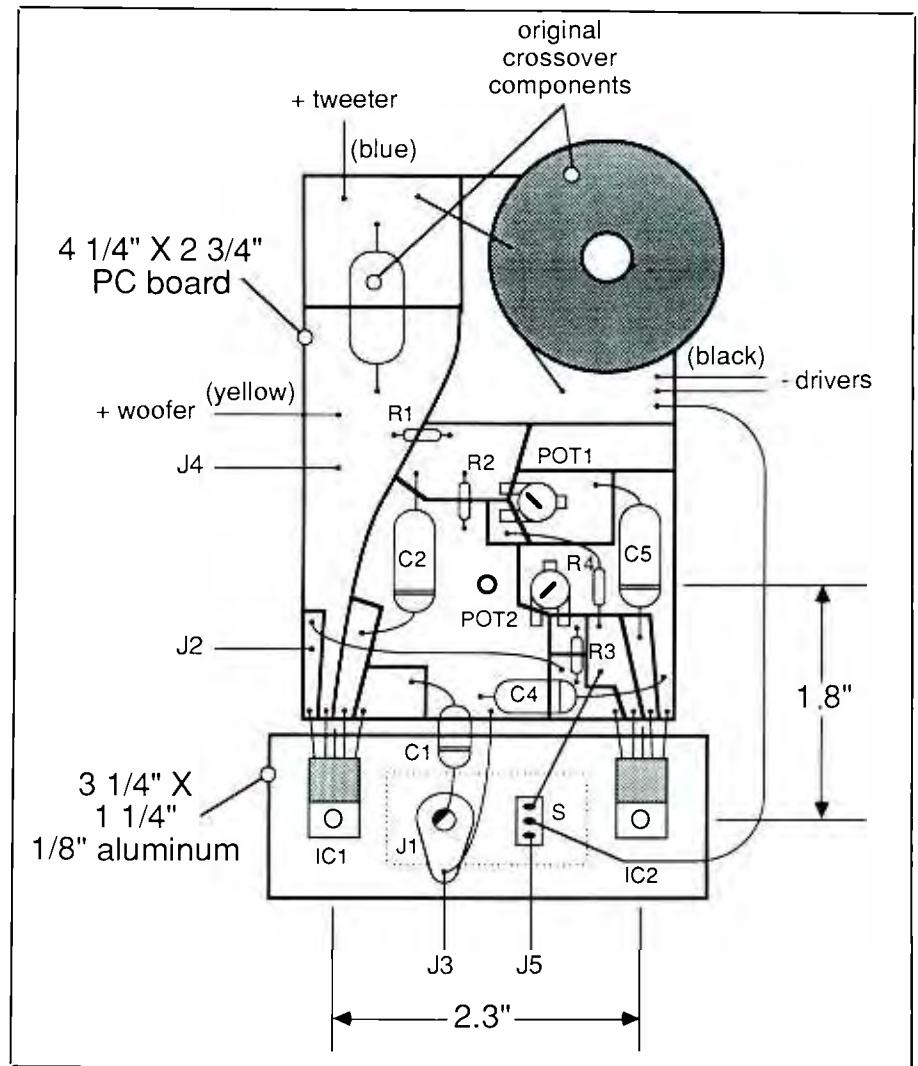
Wiring guide for pc board. All components mount on foil side of board.
